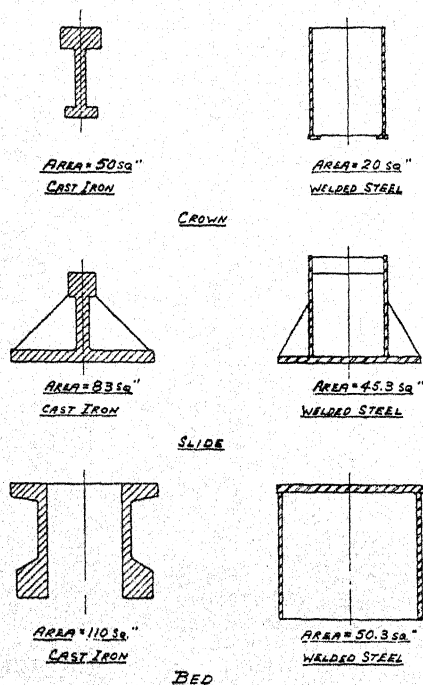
Three main parts of press in cast, (left), and welded construction.
